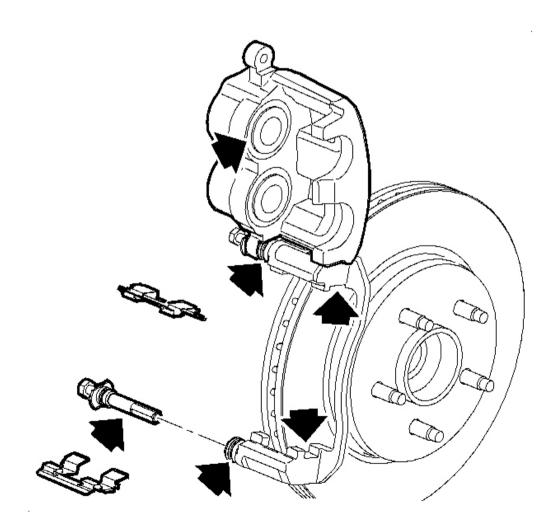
Removing/Installing Brake Pads From Brake Caliper Bracket Courtesy of GENERAL MOTORS CORP.
